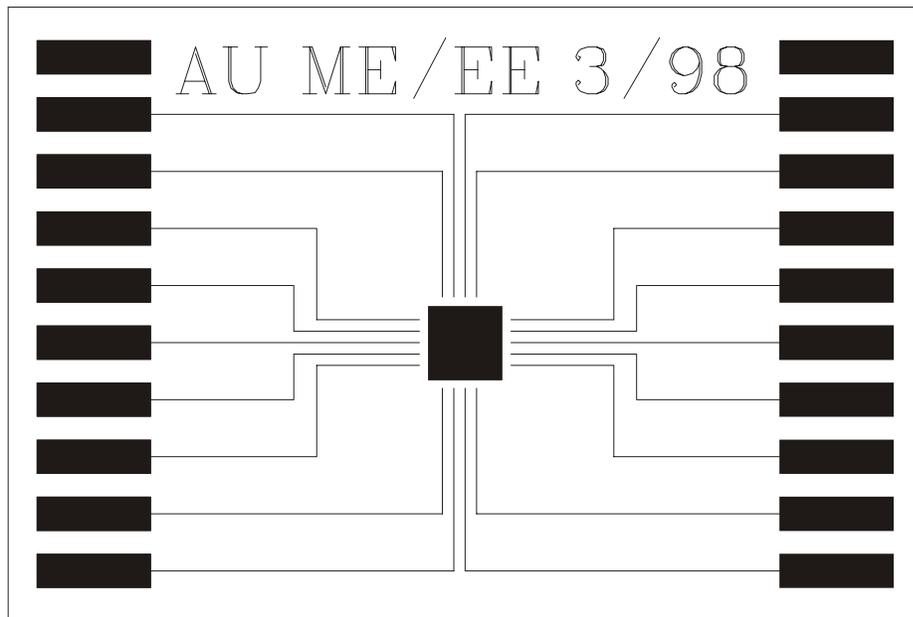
TCR and Hydrostatic Printed Circuit Board
